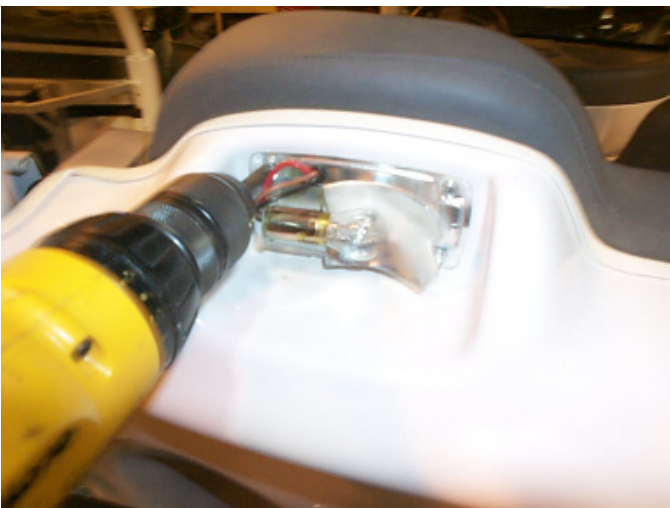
Then remove (Qty. 2) screws per rear tail light assembly. These screws secure the back panel to the seat back.
